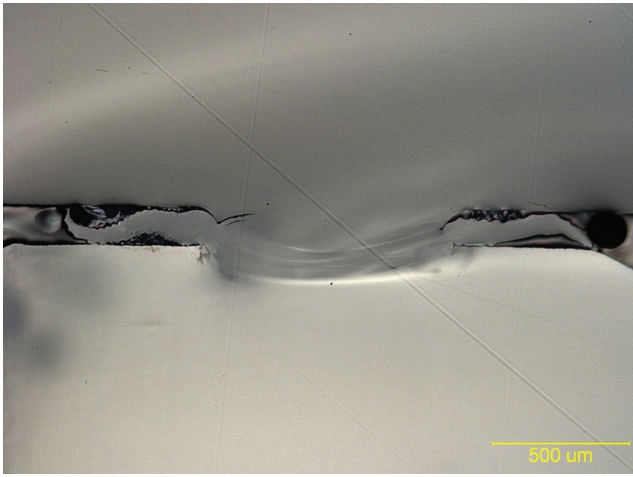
Cross section of weld joint with partially melted energy director.
